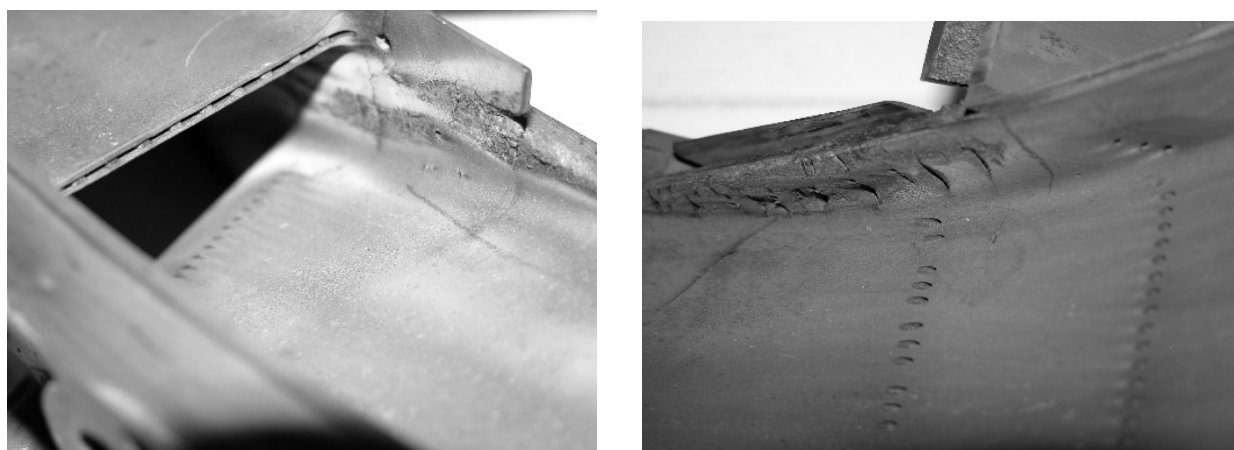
Thermal fatigue cracks in the nozzle blades
